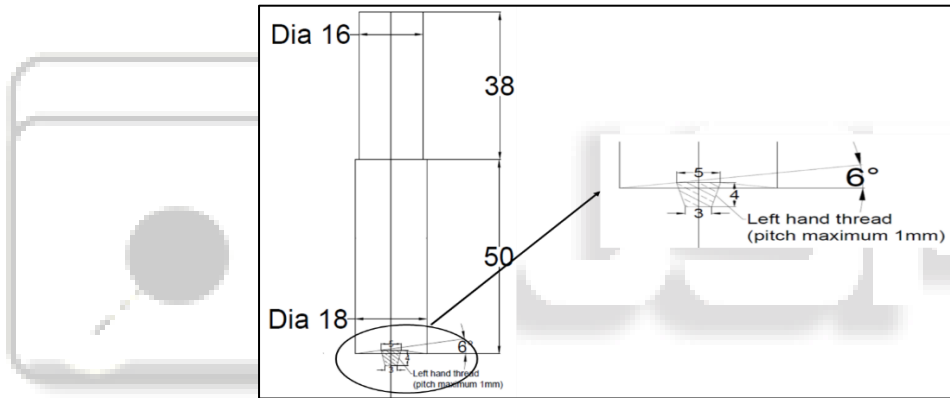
configuration of H13 tool, featuring a conical threaded pin with a concave shoulder.
